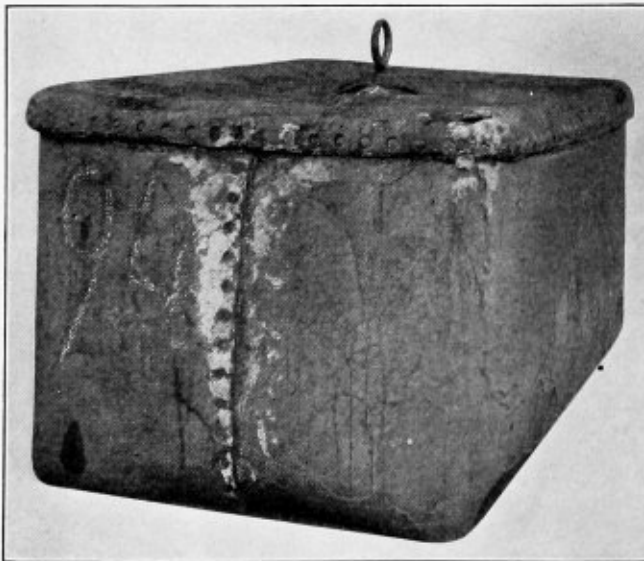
Annealing Box With Hole Burned in Corner, Rivet Heads Burned Off and Plates Sprung at Joints
